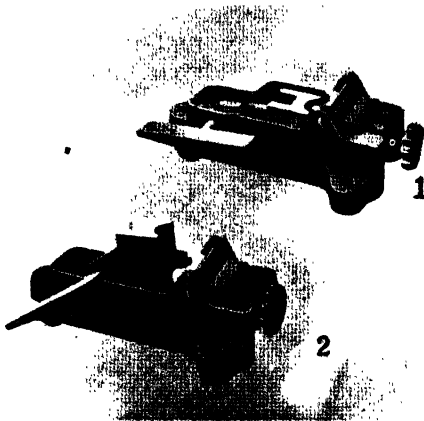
A.—Safety Clamp. (1) Clamp Closed. (2) Clamp Open.
